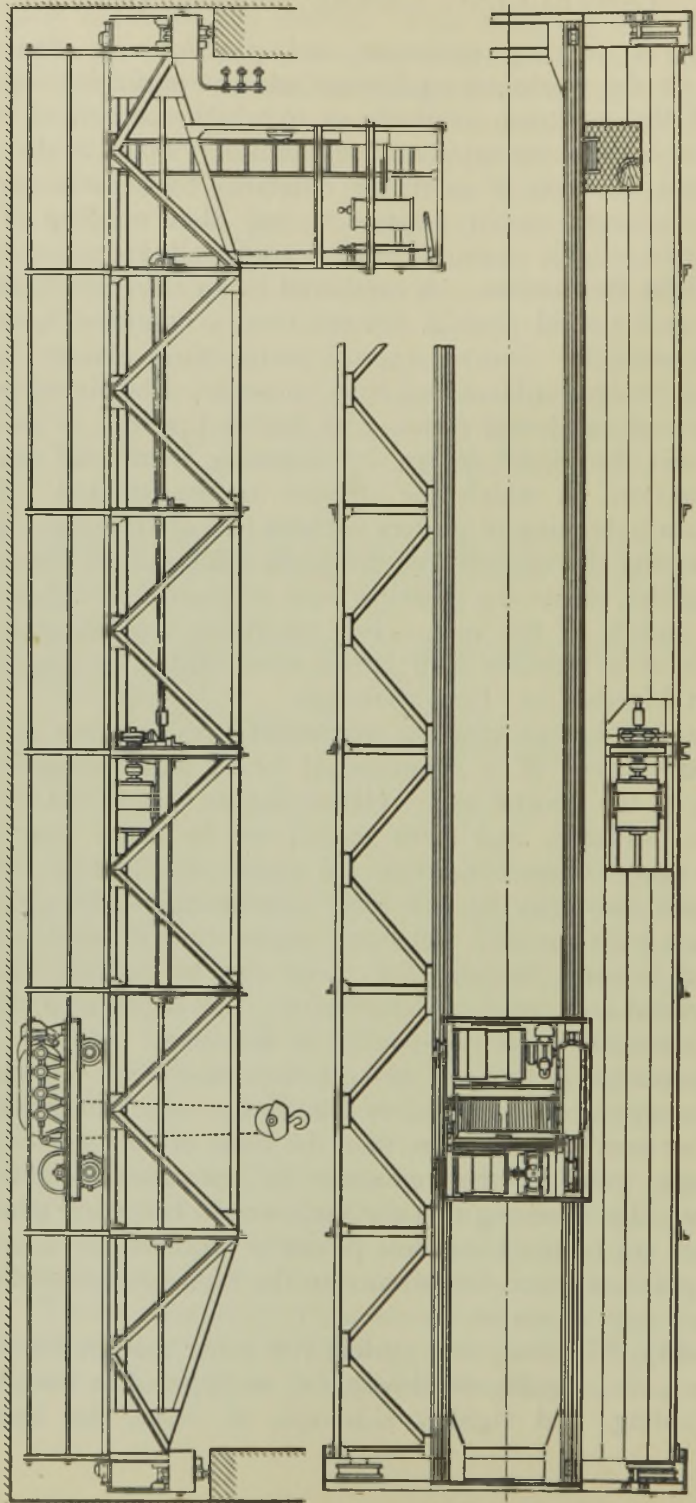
Modern Electric Overhead Traveller with Lattice Girders.
